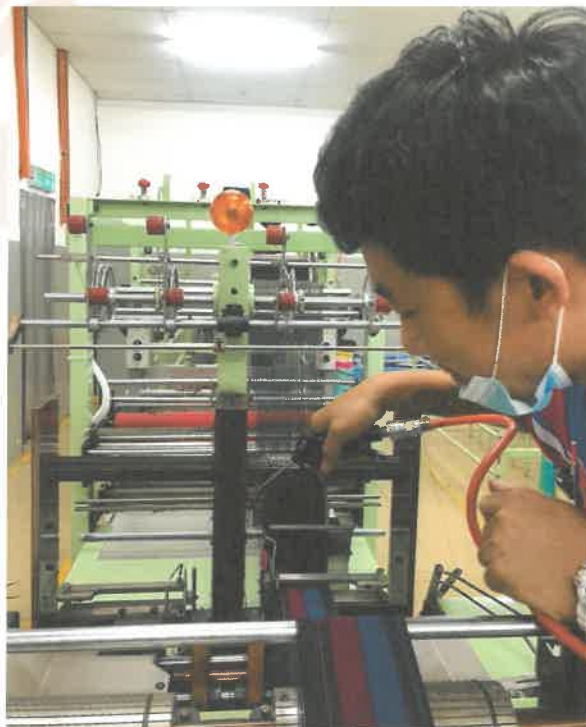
& 31: A picture of Operator Cleaning the Weaving Machine
